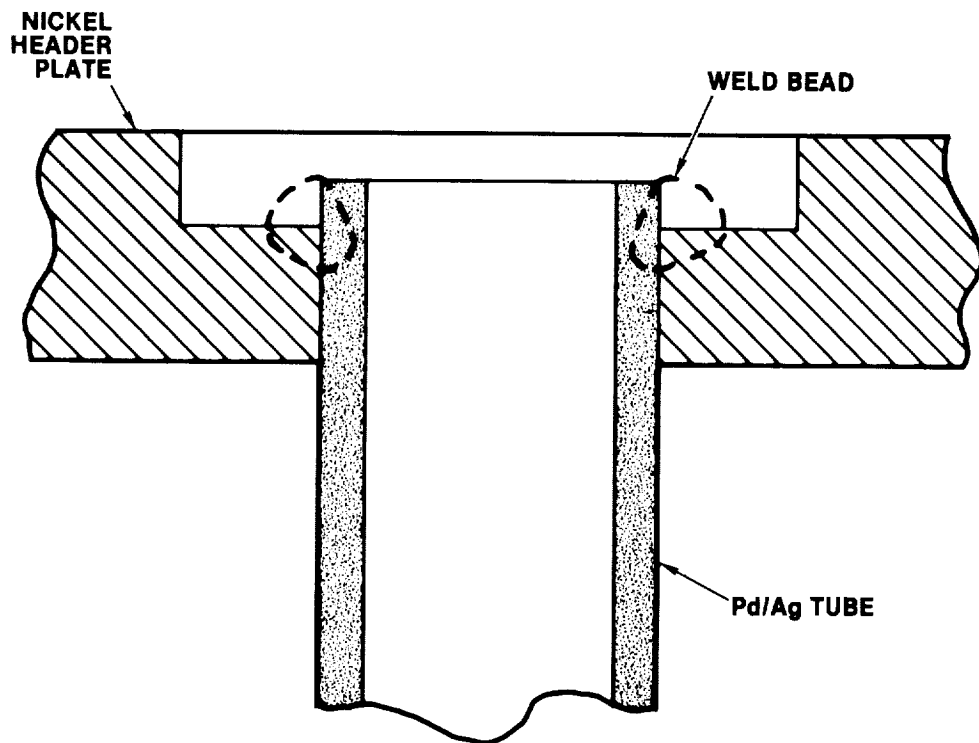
CROSS SECTION OF PRESENT WELD JOINT
